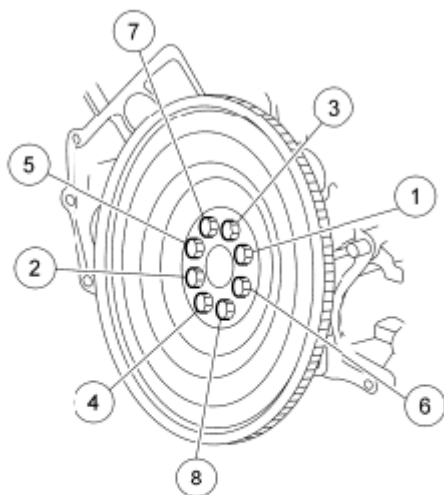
Identifying Flexplate Bolt Tighten Sequence
